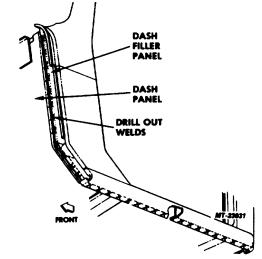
Filler Panel to Dash Panel Spot Welds
